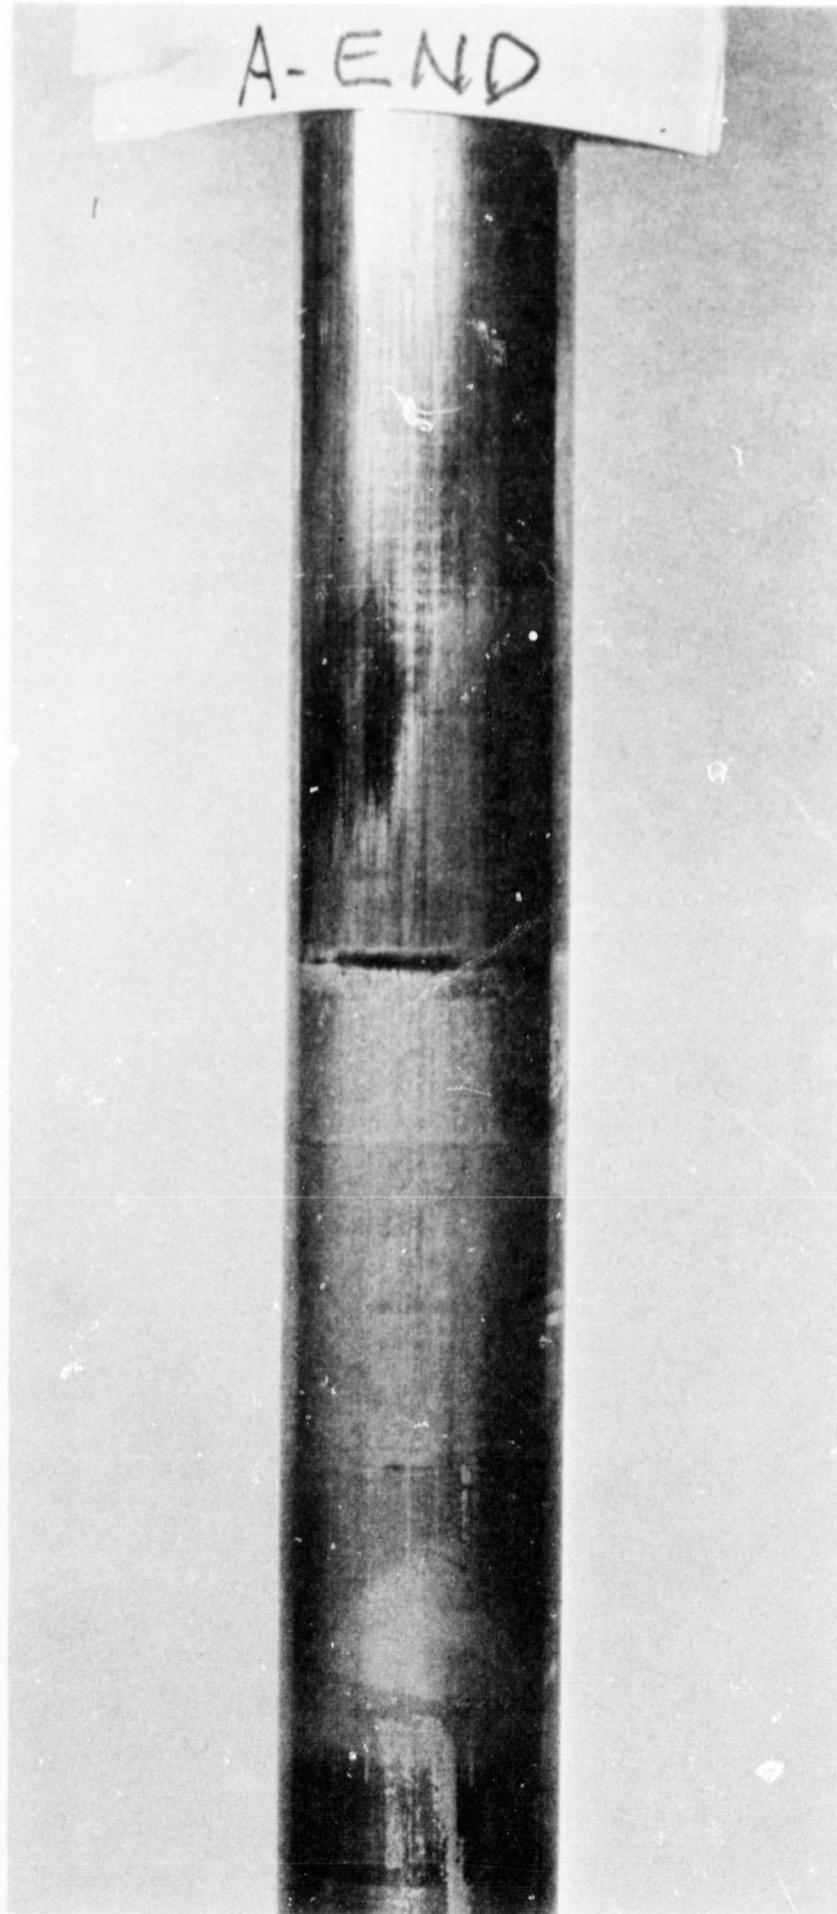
Piston Rod, A-End, One-Inch Reed Seal
